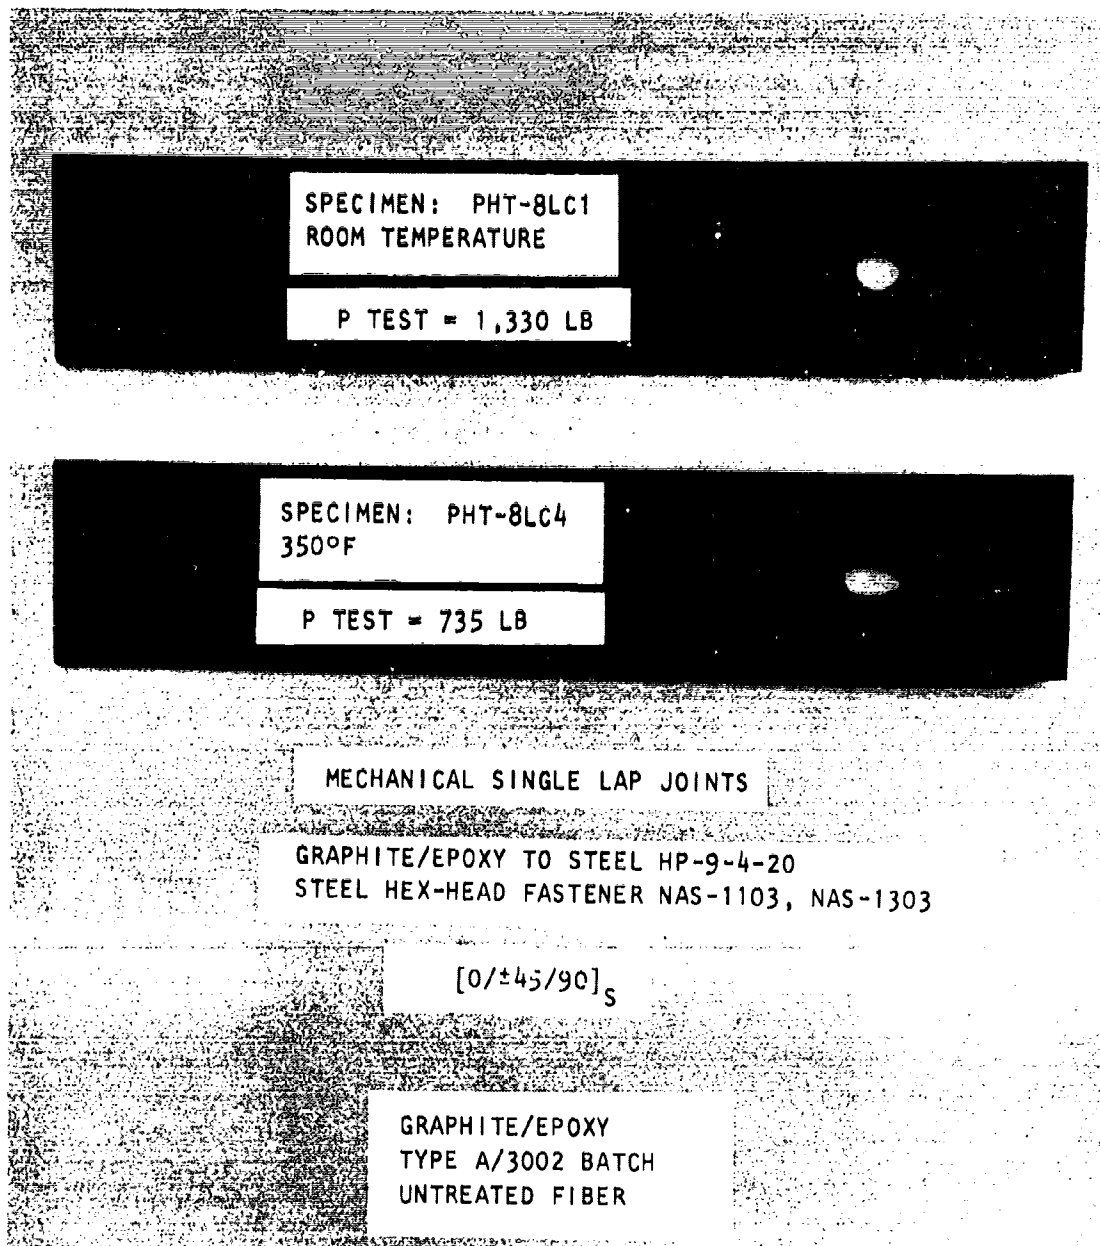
Typical Failed Single Lap Mechanical Joint Specimens - Hex Head Fastener - Graphite/Epoxy to Steel
